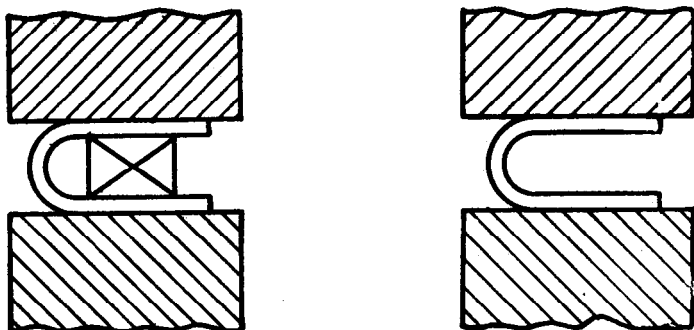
BEND TEST THROUGH AN ANGLE OF 180° OVER A SPECIFIED RADIUS
